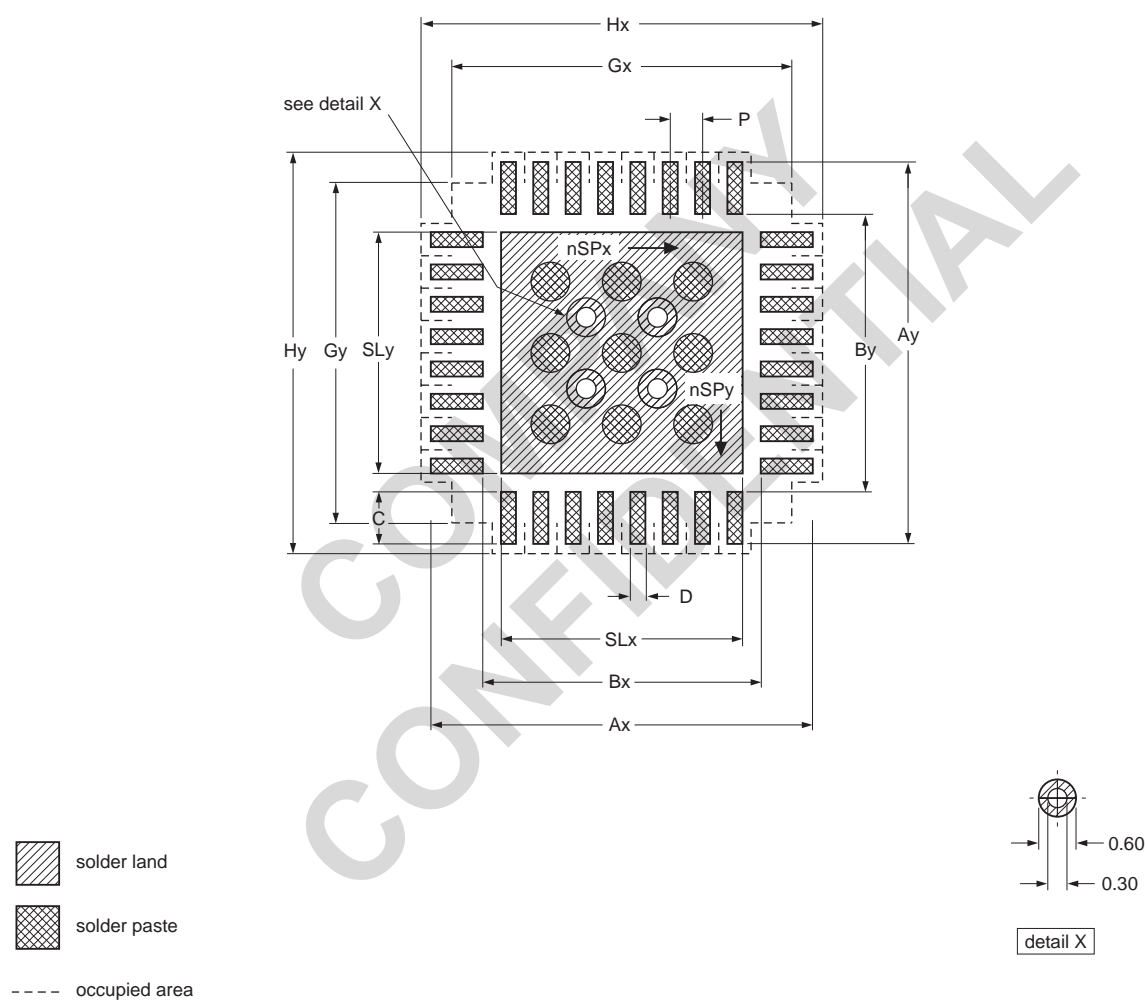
Soldering footprint SOT617-3 (HVQFN32)
